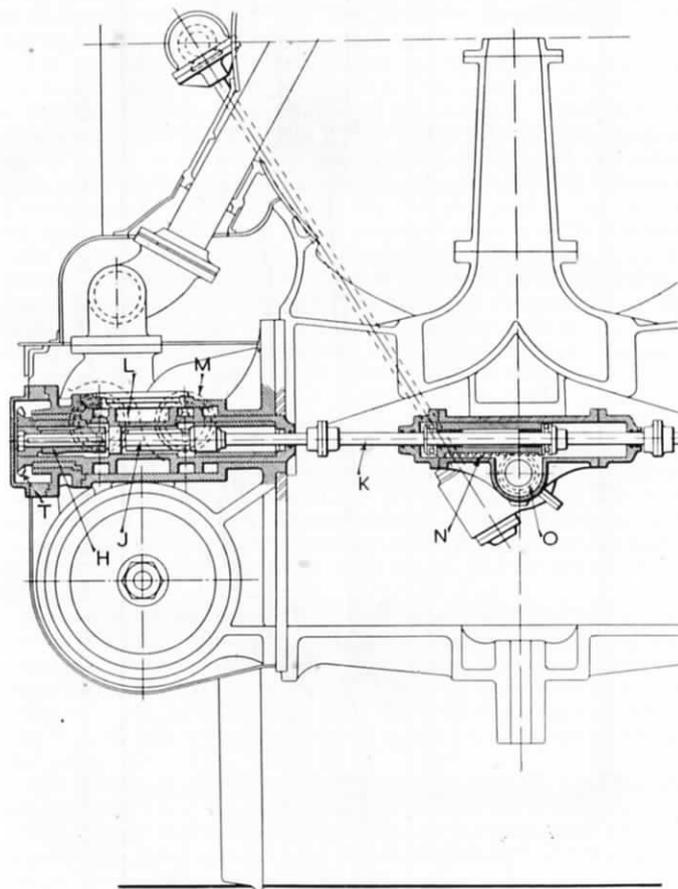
SECTION THROUGH TRANSVERSE CAMSHAFT AND CAMS; "A.L.E." ROTARY CAM POPPET VALVE GEAR.
